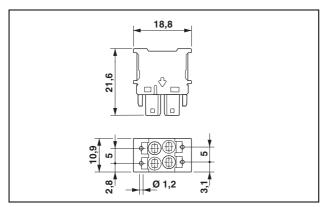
Dimensions of connector HSCP-SP 2,5-1UTT-7035
